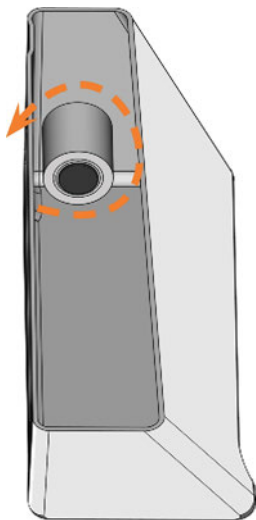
UNSCREWING THE FILTER IN THE COOLING LIQUID TANK
